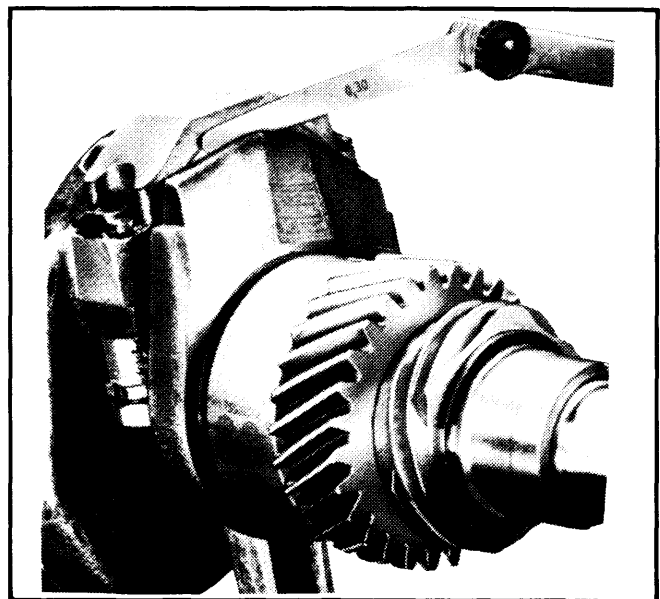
Using a Feeler Gauge to Check Connecting Rod Side Clearance
